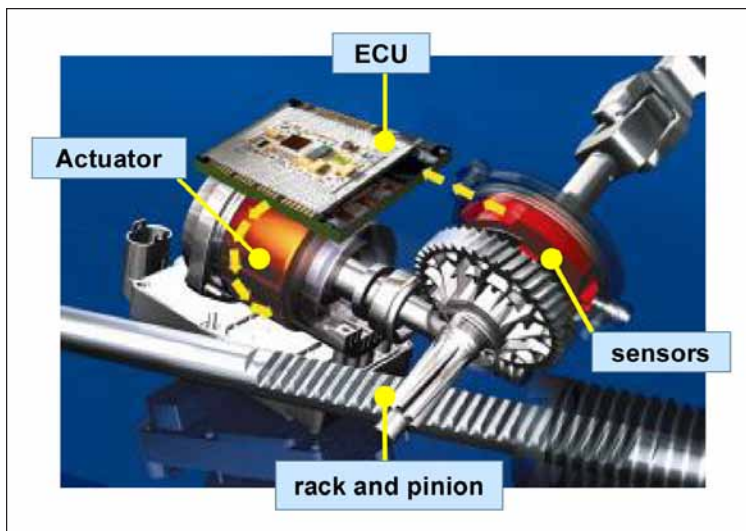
Electromechanical power steering assemblies as a highly complex mechatronic system (Ref. 4).
